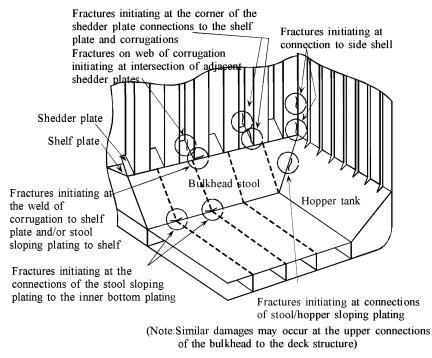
Typical fracturing at the connection of transverse bulkhead structure
